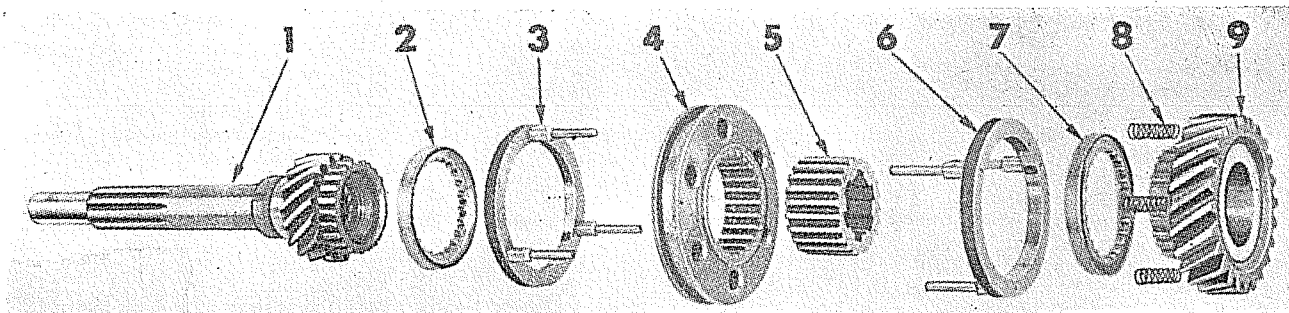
Transmission Synchroniser and Second Speed Gear Assembly (4 speed).
